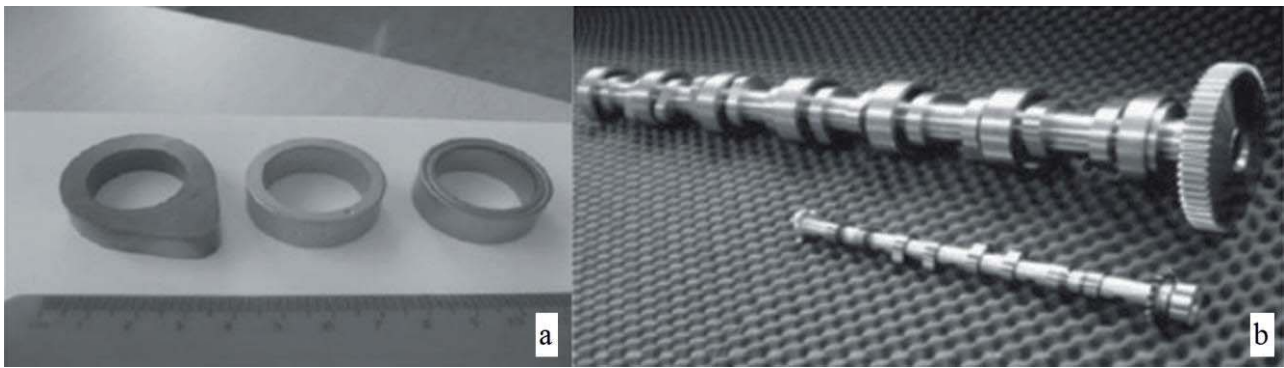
Composite motor components produced by PSM: a) cam and intermediate rings, b) camshaft
